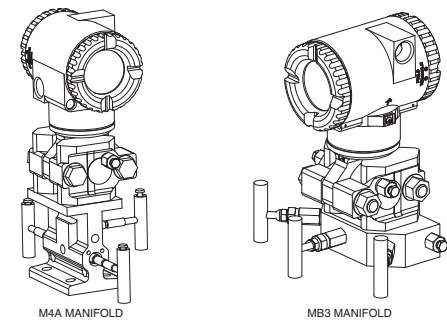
Typical Mounting of an IDP10 Transmitter Supported by a Bypass Manifold
